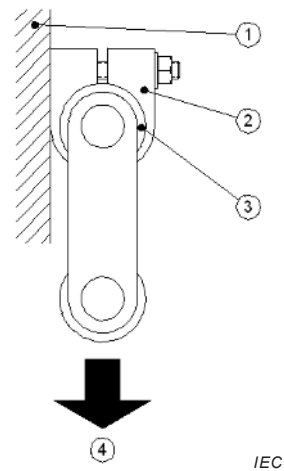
Lateral load test with load applied parallel to mounting surface on cleat with single fixing
